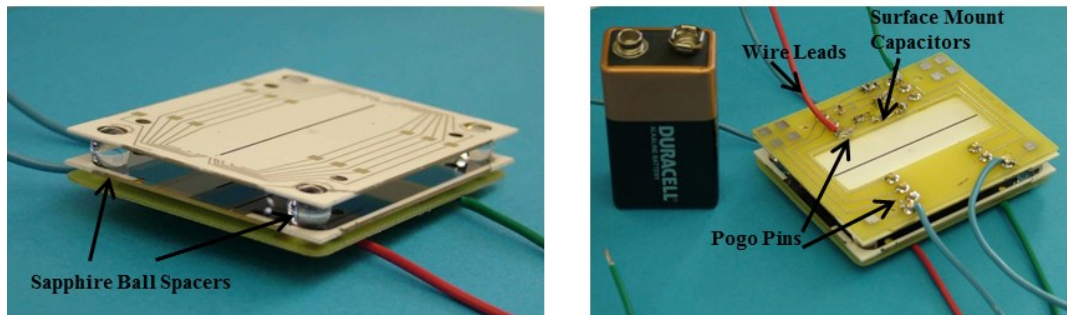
Actual plate/PCB assembly. (left) Top PCB removed. (right) Complete plate/PCB assembly. Figure from “A Lithographically Patterned Discrete Planar Electrode Linear Ion Trap Mass Spectrometer,” *J. Microelectromech. Sys.*, (in press).
